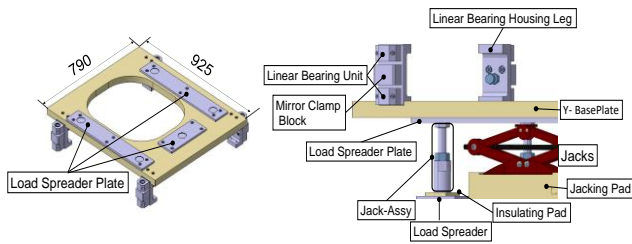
Left: Underside of Y-Base Plate. Dimensions in millimetres. Right: Detailed list of components within the ‘Lower sub-assembly’.
